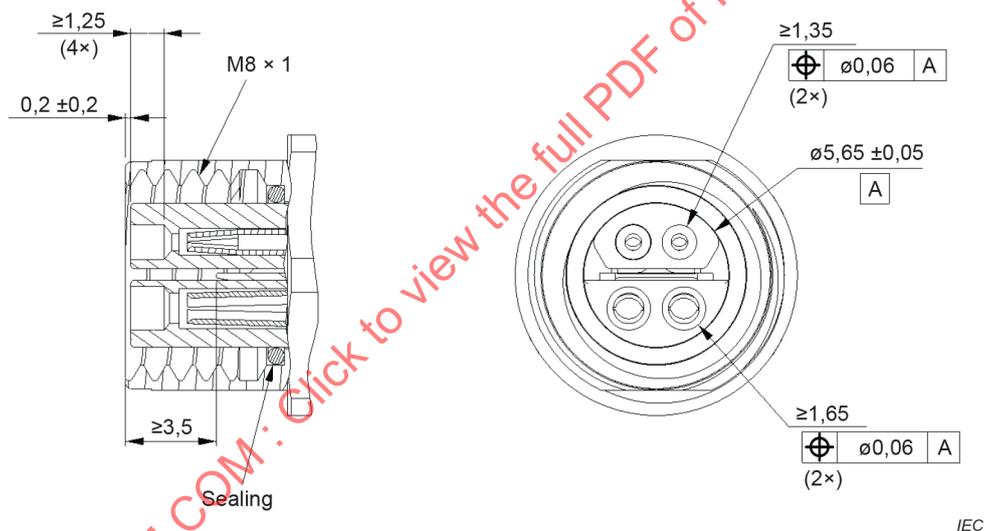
Styles 6J-M8C, 6P-M8CI, mating dimensions
